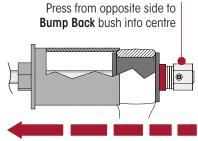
Heavy-duty Bush Tool Configuration AFTER Bump Back
